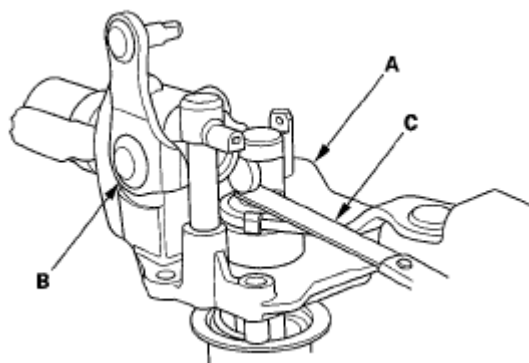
Identifying Lever, Select Lever And Feeler Gauge
